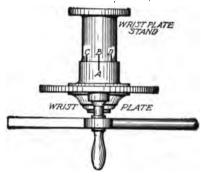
Corliss Wrist Plate for Adjusting Carrier Rod
